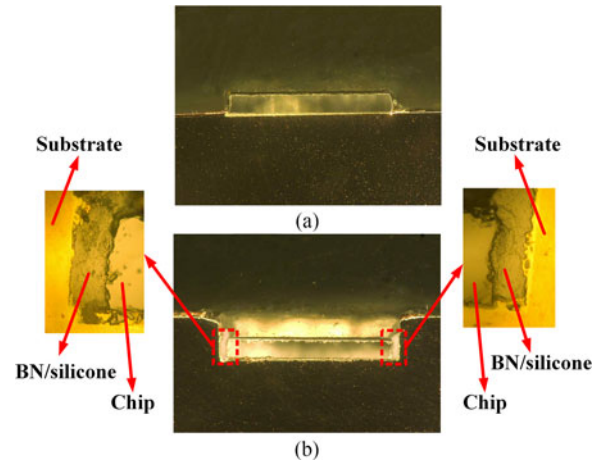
Cross sections of (a) traditional structure and (b) proposed embedding structure.
